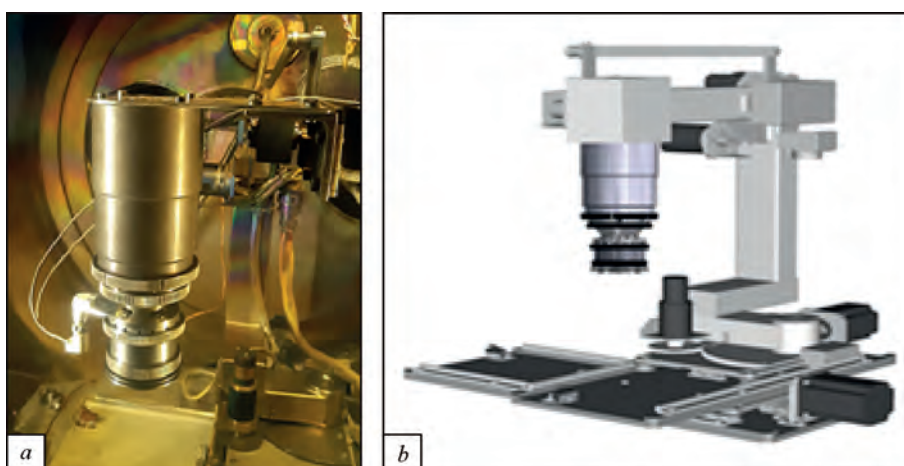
Equipment for automatic welding in space and on the lunar surface: *a* — Electron beam gun for automatic welding in space as part of the manipulator; *b* — Manipulator for electron beam gun operation in the automatic mode
